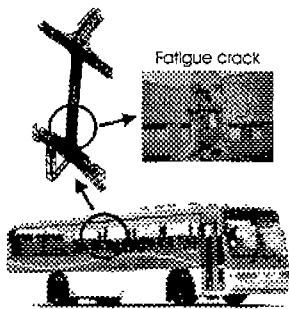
The shape of bus window pillar joint and typical fatigue crack
